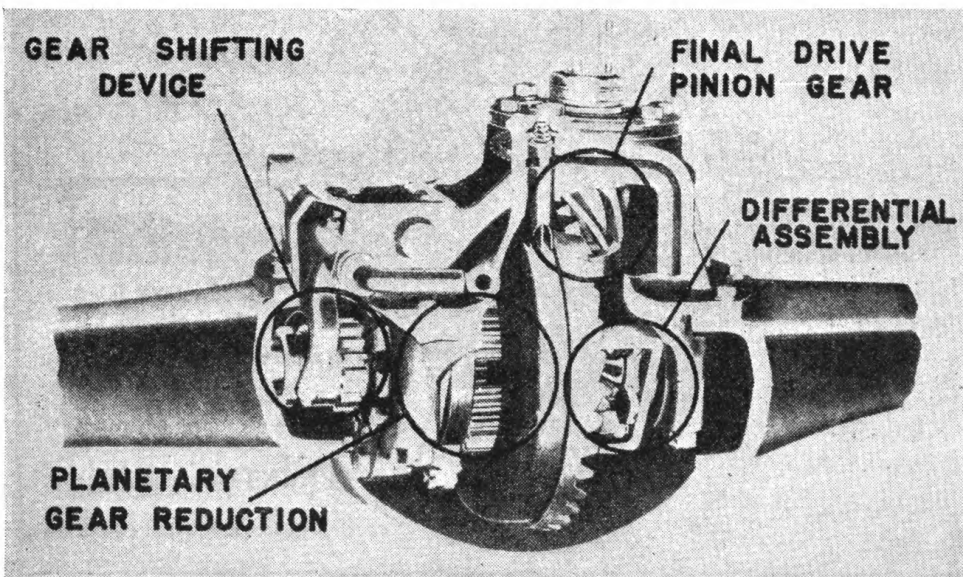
Dual ratio final (axle) drive with differential assembly. Planetary gearing for gear reduction is shown at left center, while shifting arrangement is shown at extreme left.
